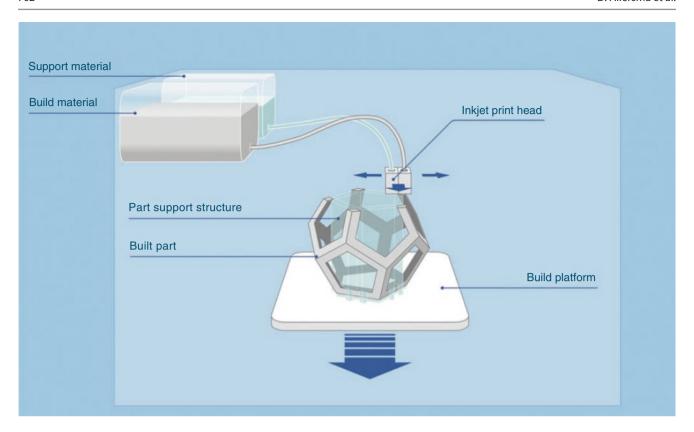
Schematic representation of a typical material jetting printer (inkjet printer) that prints a bigger object for which a supporting structure is required. (Reprinted from Additively.com)
